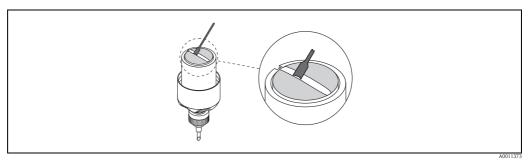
Coating the contact surfaces of the sensor with coupling fluid
